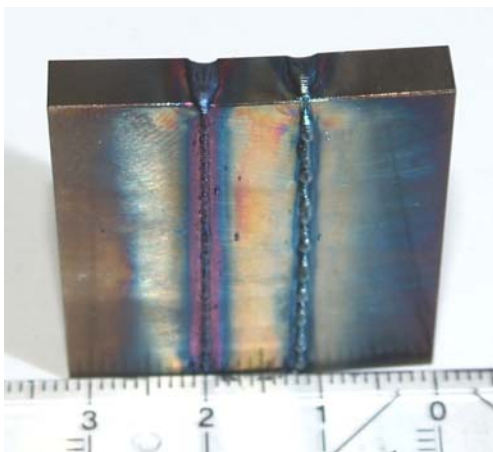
Test piece of the planned Fe-54 heat specimen fabrication method. To spare the valuable Fe-54 isotope alloy, a centre stripe of the isotope alloy is elongated by two stripes of normal EUROFER. The joints are fabricated by EB welding.
